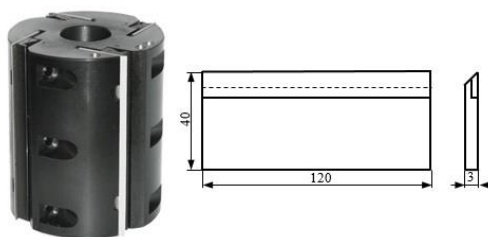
Assembled cutter head with HM insert knives, type K40 and K20
